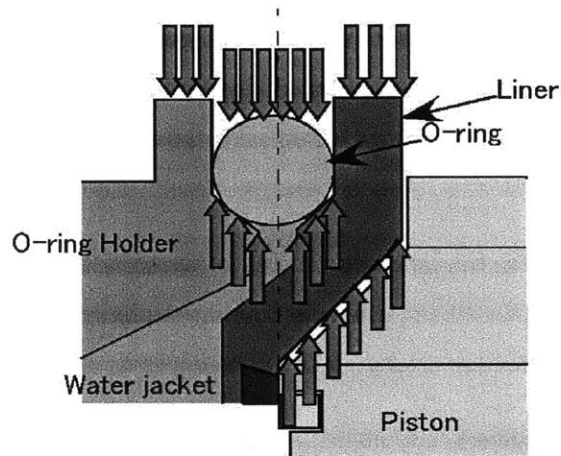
The mechanism of coolant seal and combustion chamber pressure balance [41]
